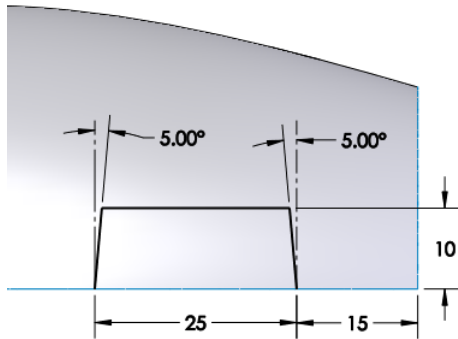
Sketch of the first section for creating the lofted surface of the handle
